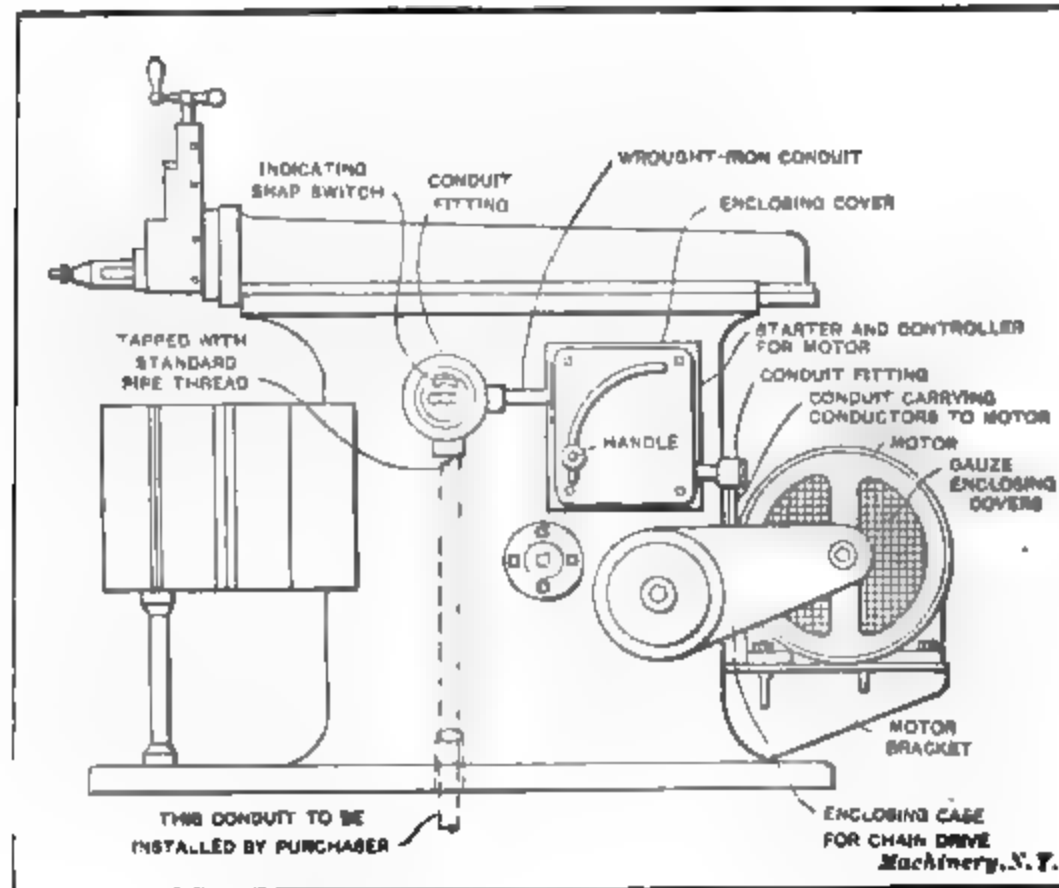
A Motor-driven Shaper with Completely Enclosed Wiring
